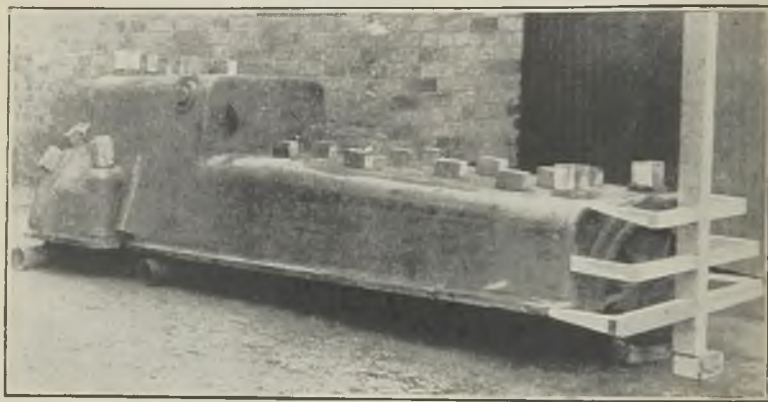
PATTERN FOR THE OIL-ENGINE BEDPLATE AS PLACED ON DRAG.
